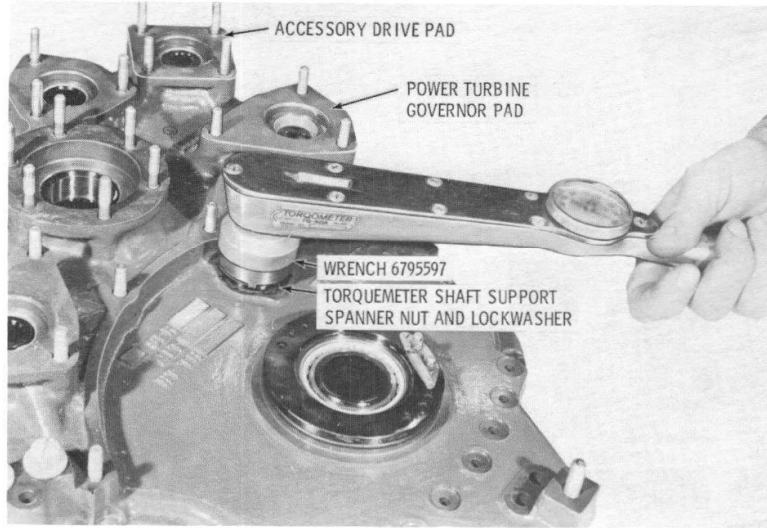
A. Power and Accessories Gearbox Cover Assembly (Sheet 1 of 2)
